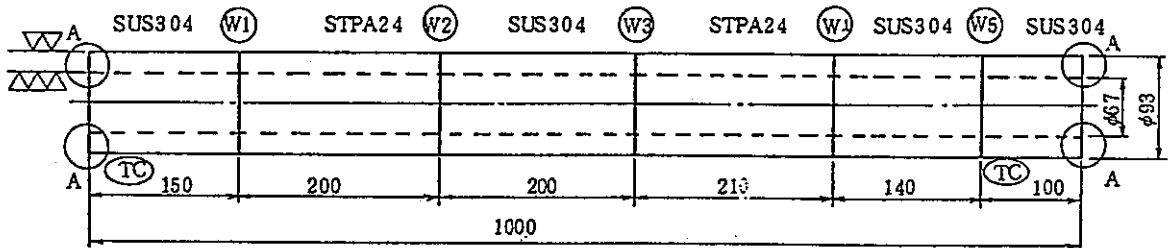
A. 5 Thermal Creep-Fatigue Test of SUS316 Weldment
